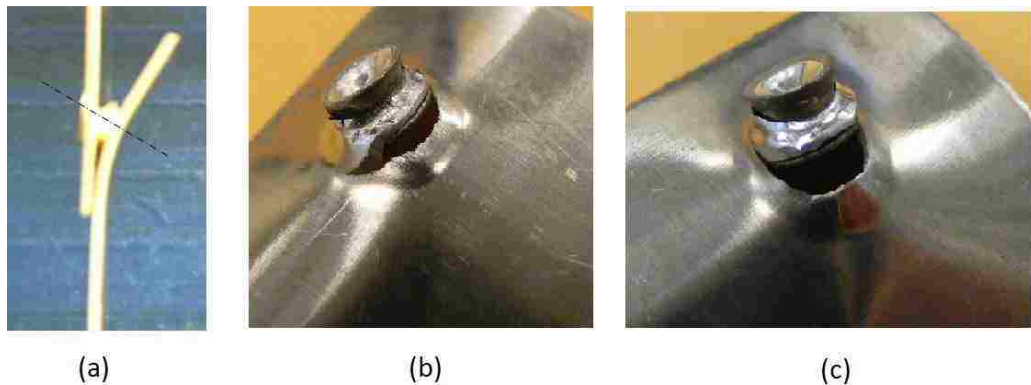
(a) Rivet rotation before final joint failure; picture from video-recording of the tensile tests. Upper sheet shearing due to rivet rotation in (b) 1.3 mm and (c) 1.75 mm SPR NA lap joints.
